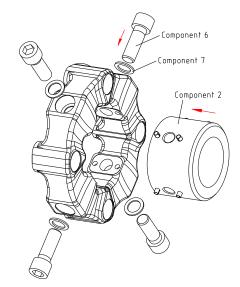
Assembly of the elastomer part to the hub radial (Example: type E2HP)
